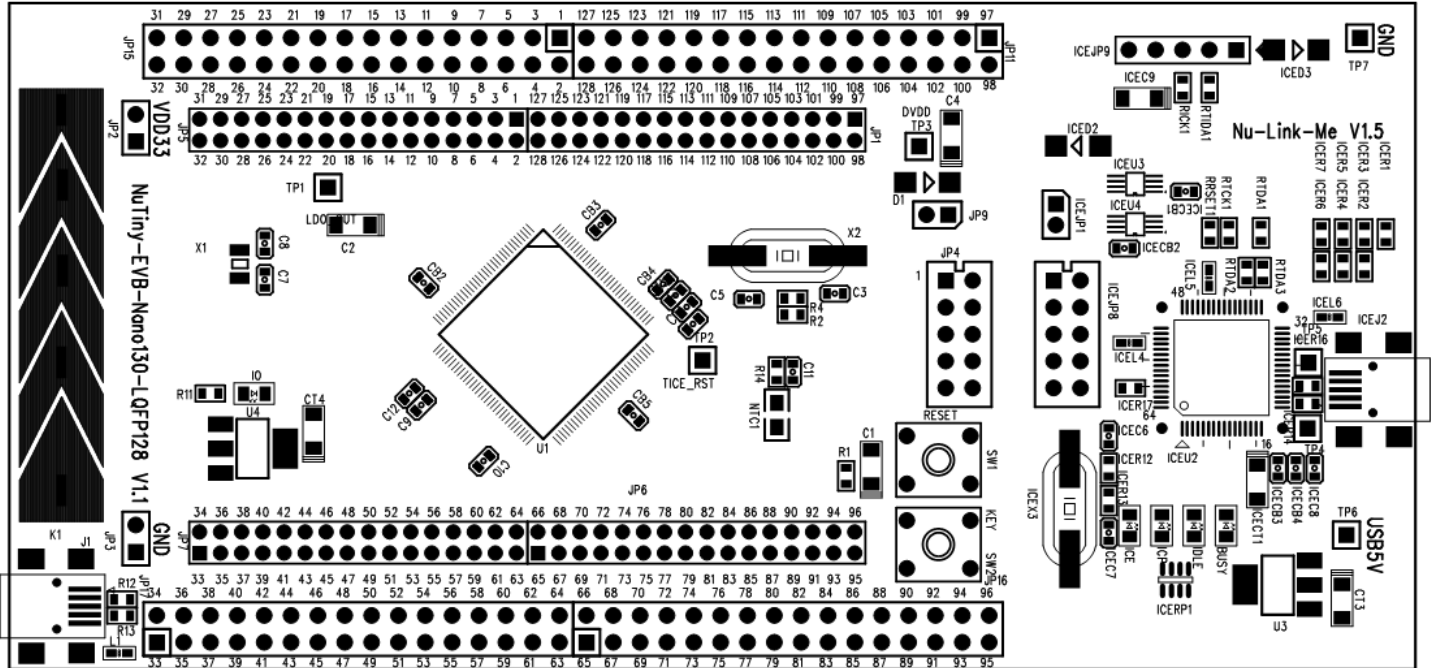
NuTiny-SDK-Nano130 PCB Placement
